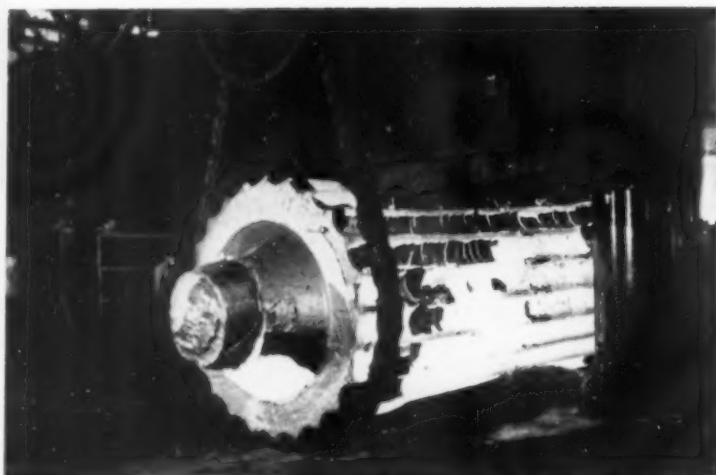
First forging heat in 7500-ton press at Bethlehem Steel Co. A 275-ton ingot is being forged to rectangular shape. The part is a press column brought to a final length of 110 feet in several stages.
